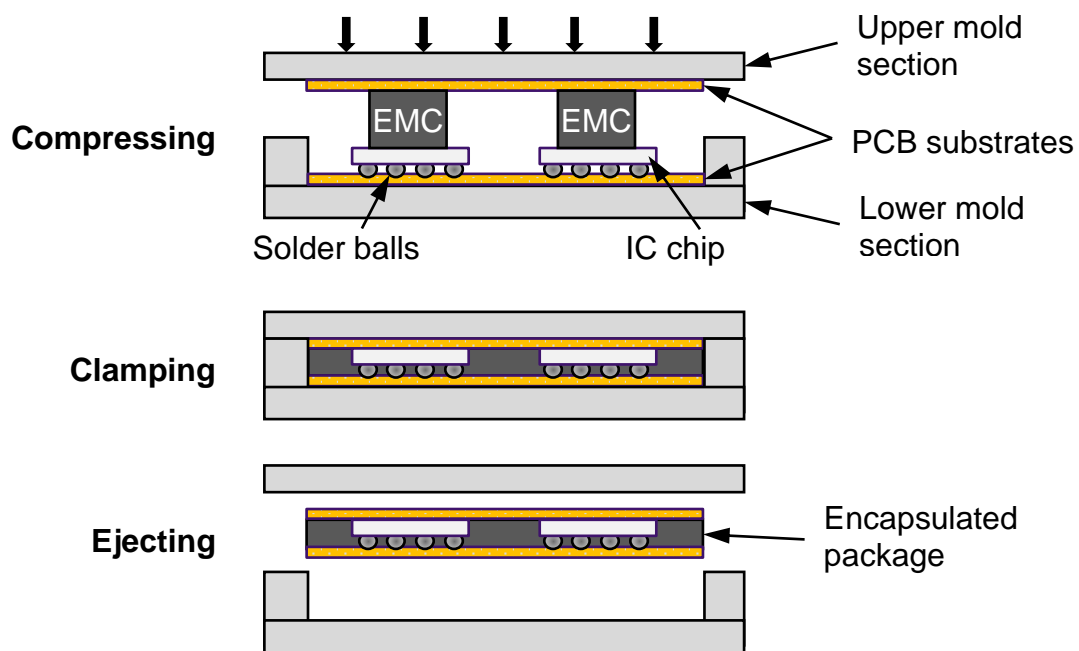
Compression molding of a multichip module package - adapted from [35]
